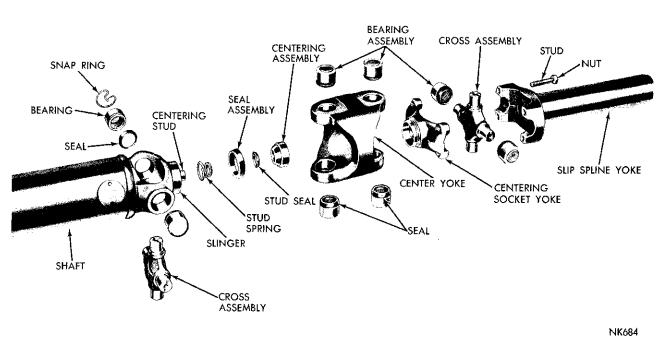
Front Universal Joint—Cross and Roller —Sliding Yoke Type
